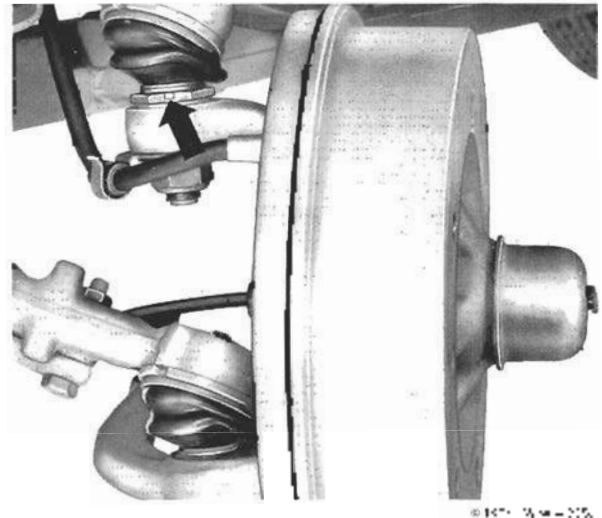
The notch of the eccentric camber adjusting bushing.
